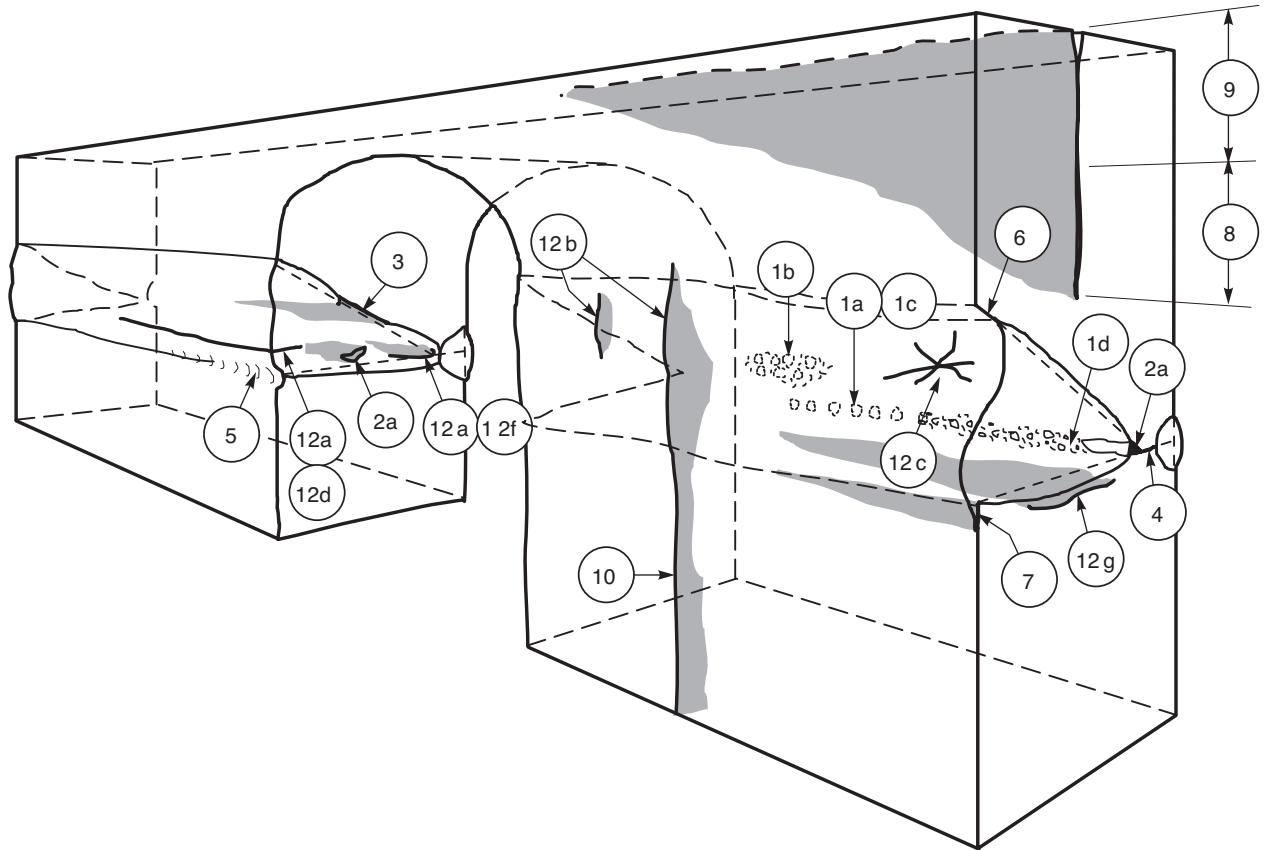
Single-V-Groove Weld in Butt Joint (see L2)
